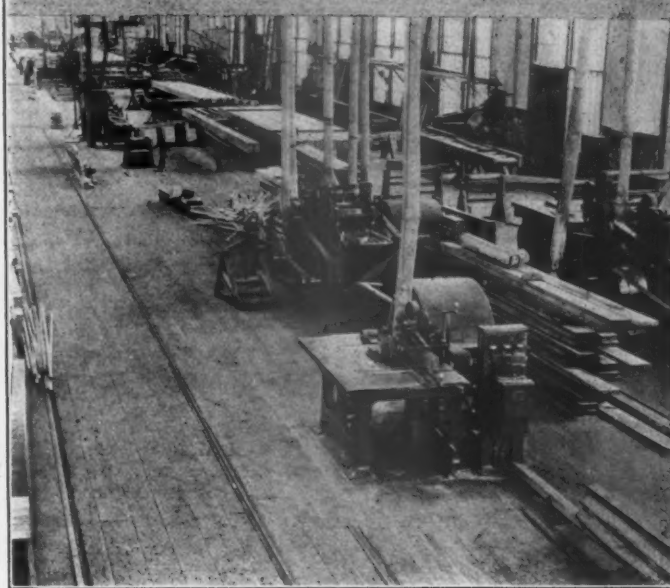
SILL DEPARTMENT OF THE PLANING MILL.
